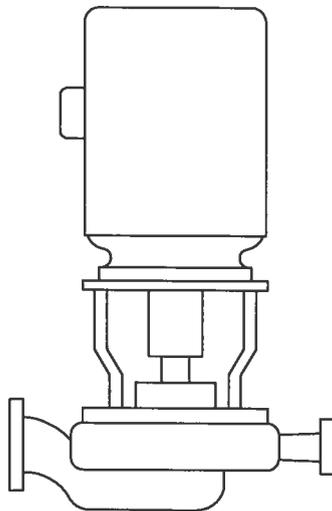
Pump type OH4: Vertical, in-line mounted, single stage, rigidly coupled to the driver shaft
